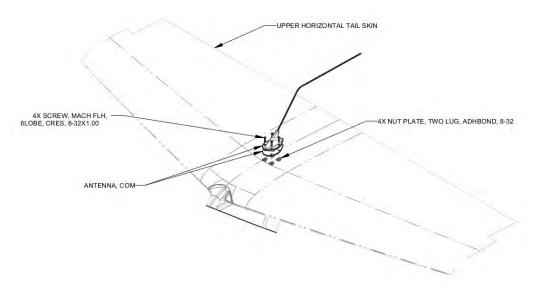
COMM ANTENNA – EXPLODED VIEW
